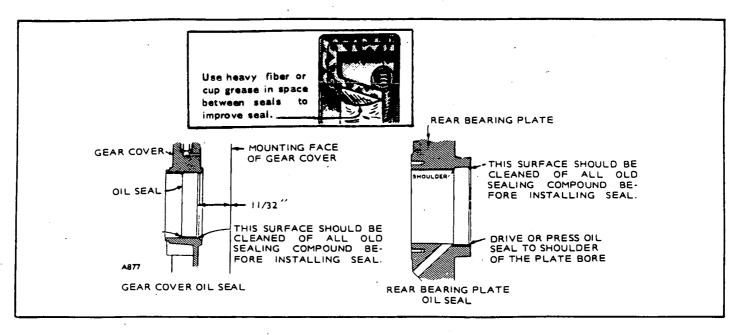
GEAR COVER AND REAR BEARING PLATE OIL SEALS
